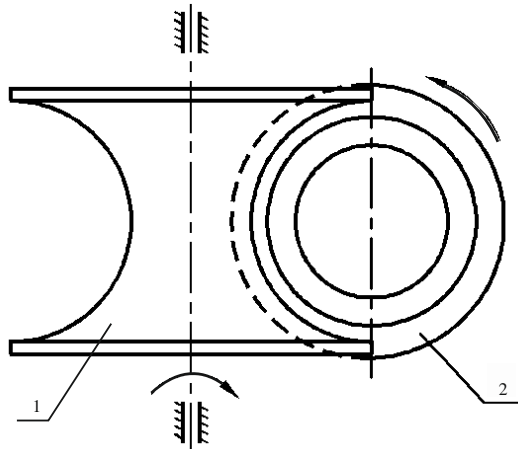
Roller device for waste treatment: 1 – roller with vertical axis of rotation; 2 – roller with horizontal axis of rotation [23]
